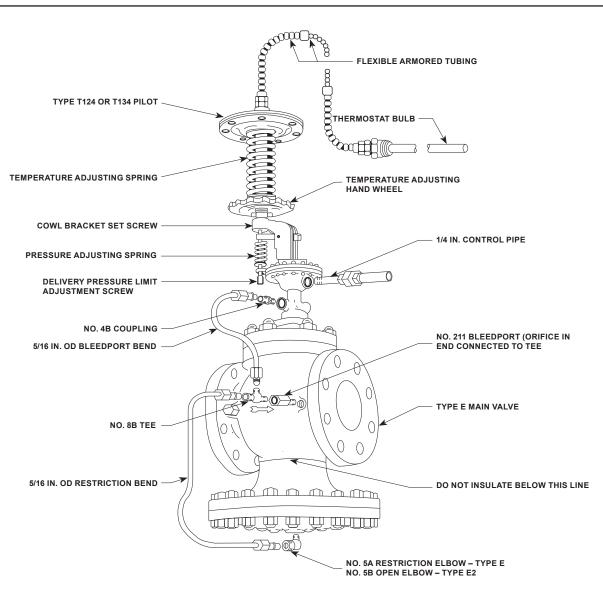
Regulator Assembly for Type ET214 or ET134 with Integrally-Mounted Pilot
